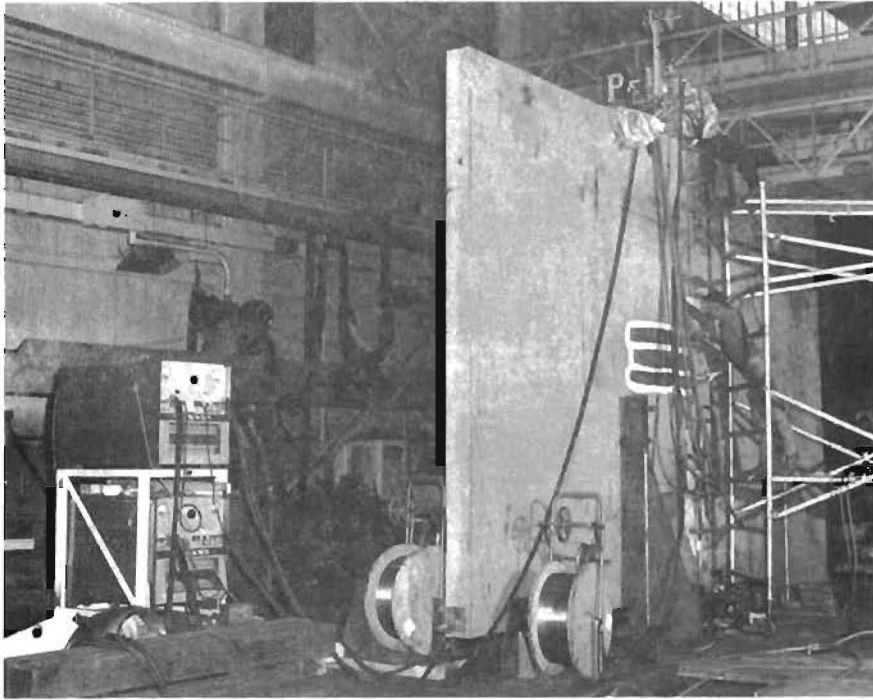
This photograph illustrates a weld 13 feet long between two 8-inch plates using the electroslag method. The weld was completed in four hours and twelve minutes.
